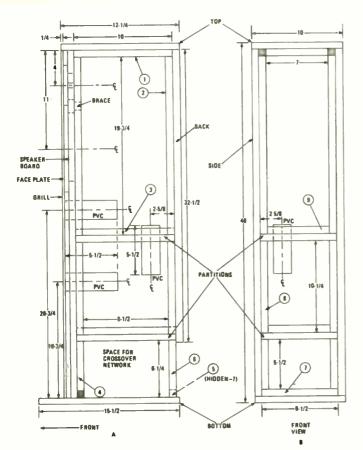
All dimensions for the cabinet are given in inches. The side view (A) is what you would see with one of the sides removed. The front view (B) is what you would see with the front taken off. One brace of each type is numbered and the numbers correspond to those in Table 1. Brace 5 is hidden from both views, but is pointed to.
